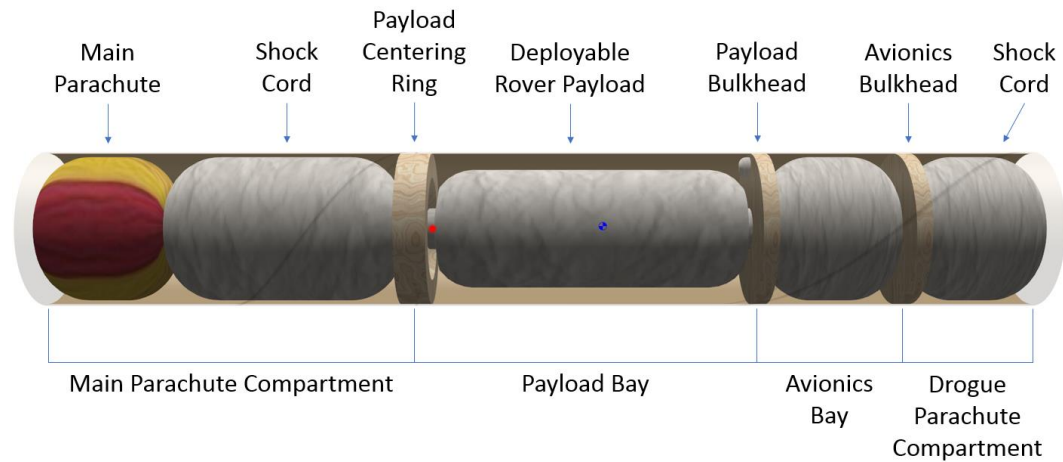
Assembled Midsection with Component and Subassembly Labels
